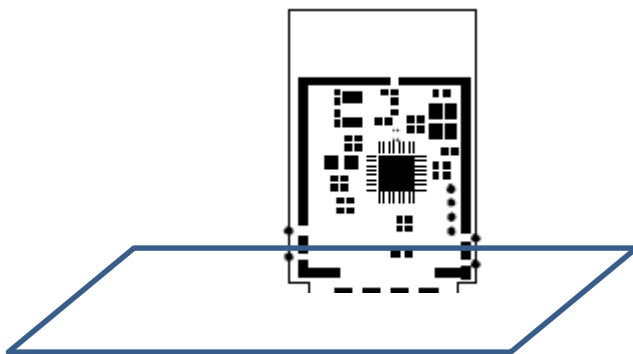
Elstat Bluetooth Module vertically mounted onto PCB
